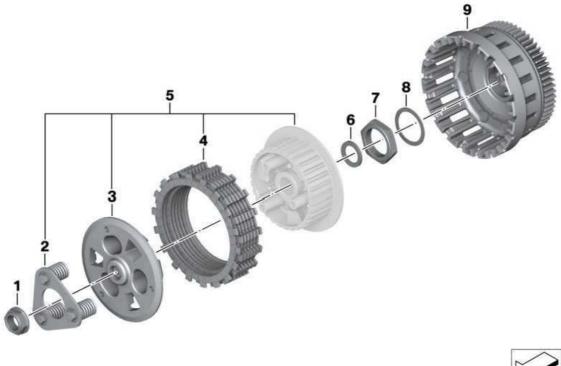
Exploded view of a friction clutch of an BMW GS [11]
